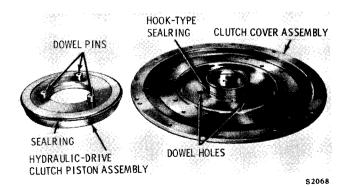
Hydraulic drive clutch piston and clutch cover (VH series)
